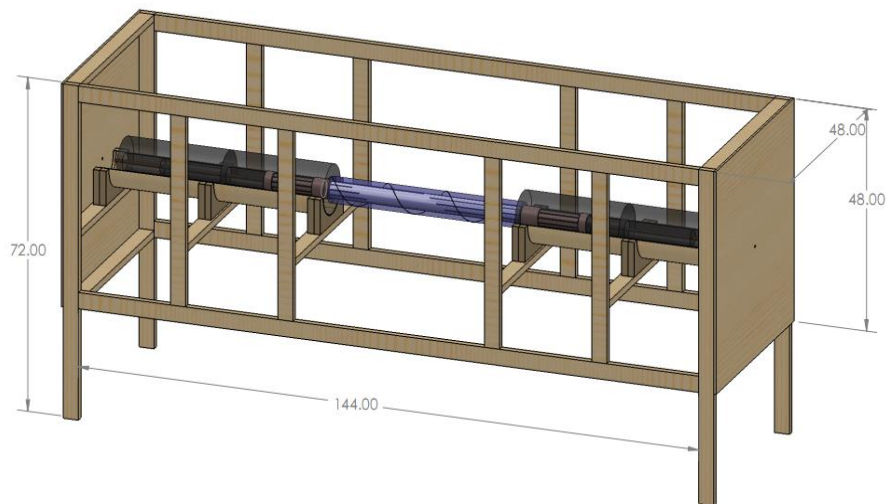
3-D drawing of the PIT showing structural supports and wood frame (dimensions are in inches).
